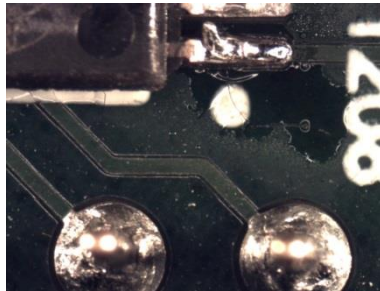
excess solder remaining on the PCB. Prior to electrical analysis remaining solder flux should be removed from the board.
